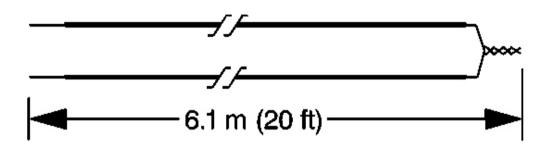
Fabricating 20 Ft. Deployment Harness Courtesy of GENERAL MOTORS CORP.
